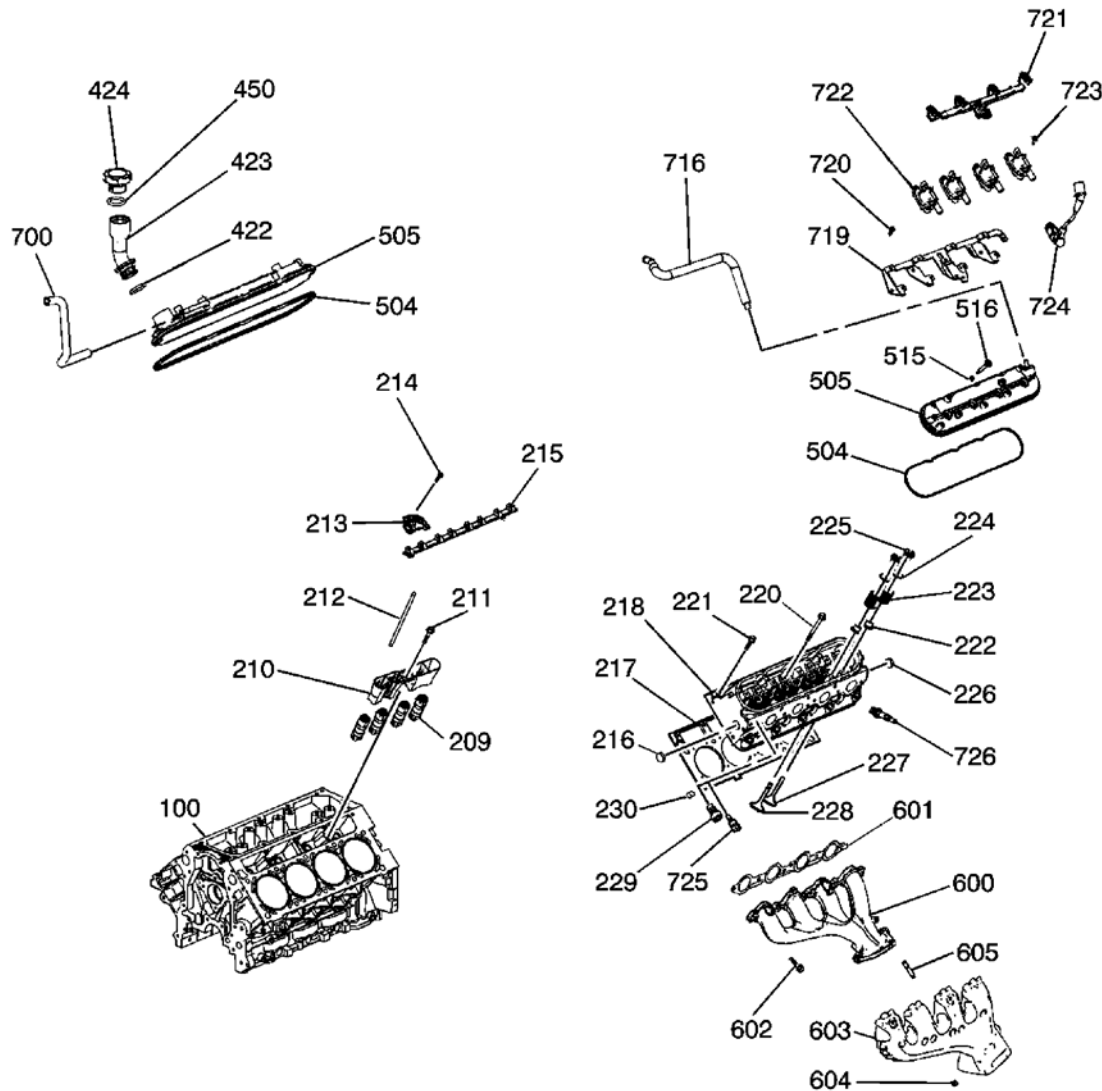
Disassembled View Of Cylinder Head/Upper Engine
